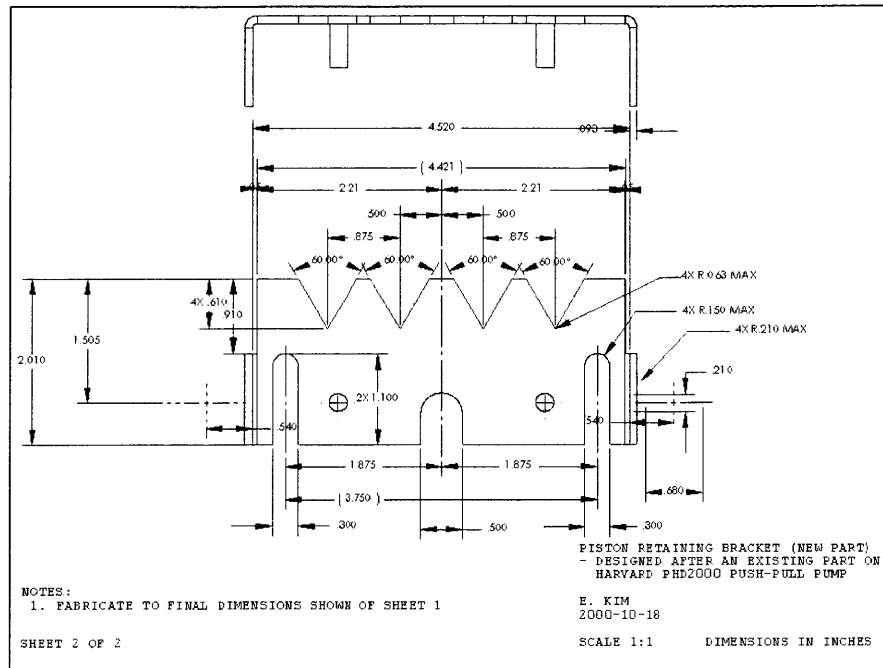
Piston Retaining Bracket, sheet 2 of 2
